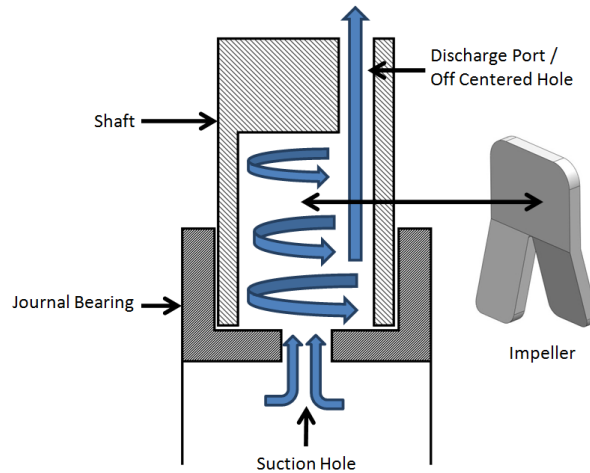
Shaft which operates as a centrifugal pump, lubricating the two bearings [3.12]
